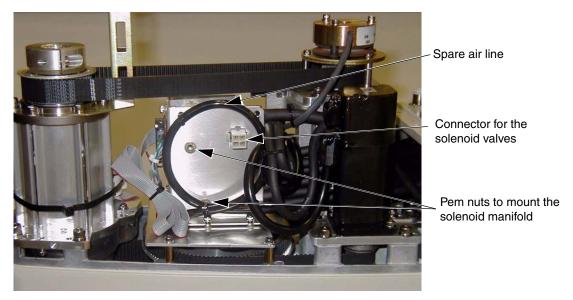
Solenoid Mounting Bracket with Connector and Spare Air Line
